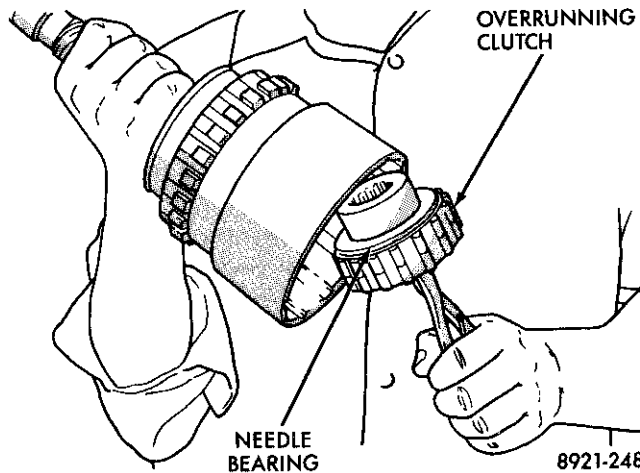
Overrunning Clutch Assembly Removal/ Installation
